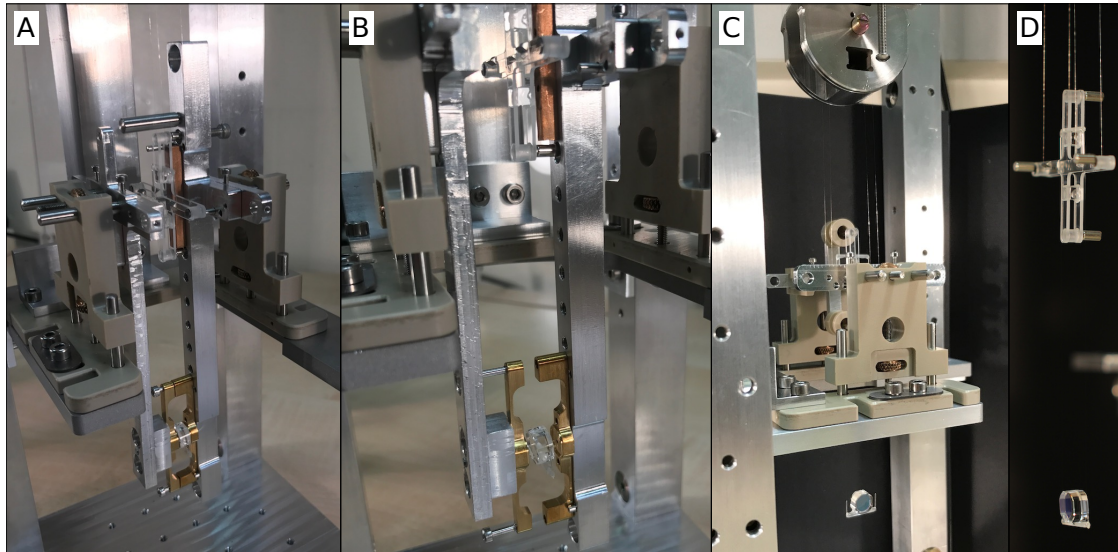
Picture A shows the weld jig and the cap removal tool mounted to the horizontal-vertical adjusters of the ECD assembly. The removal tool is interfaced with the top cap. In Picture B the cap is opened and the weld jig as well as cap removal tool slightly retracted. Picture C depicts the re-introduced ECD assembly with the glued monolithic assembly and Picture D presents a side view of the glued monolithic assembly.
